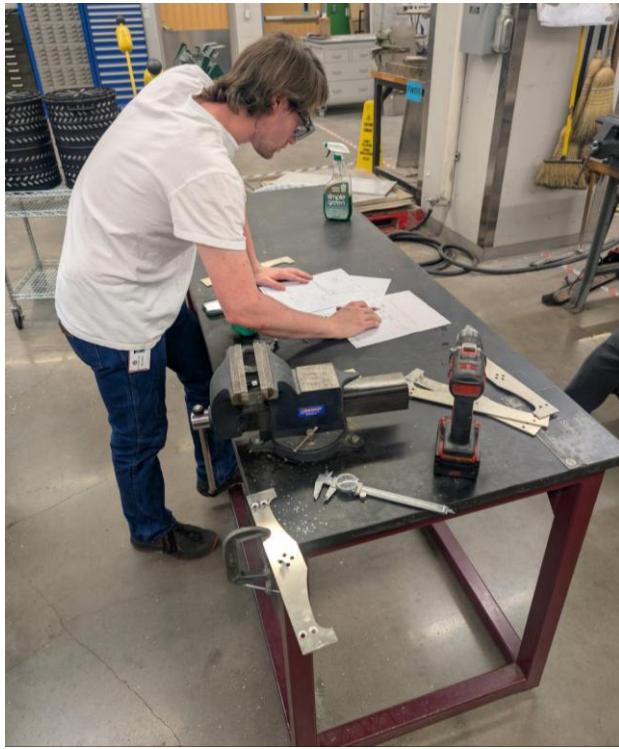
A team member prepares to bend the aluminum section of the thruster arms. (team-fig)
